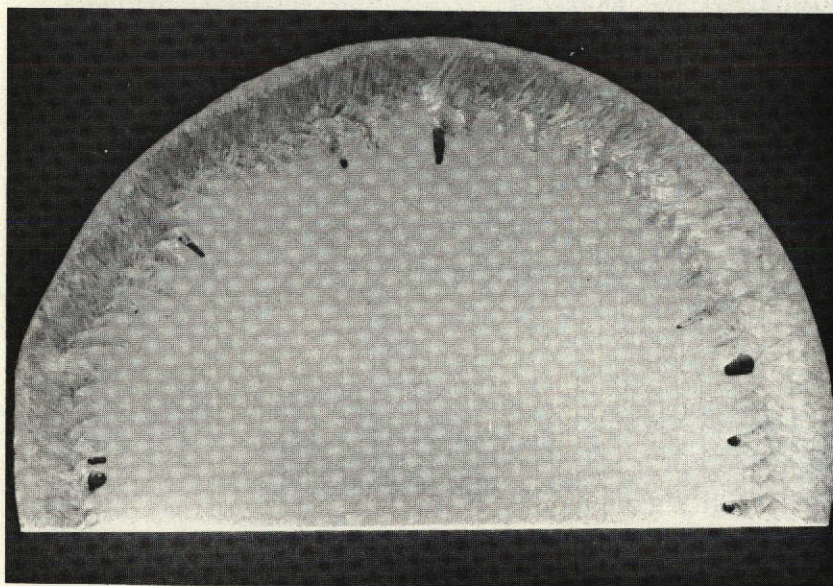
Longitudinal Macrosection of Fuel Pin End Cap to Tube
